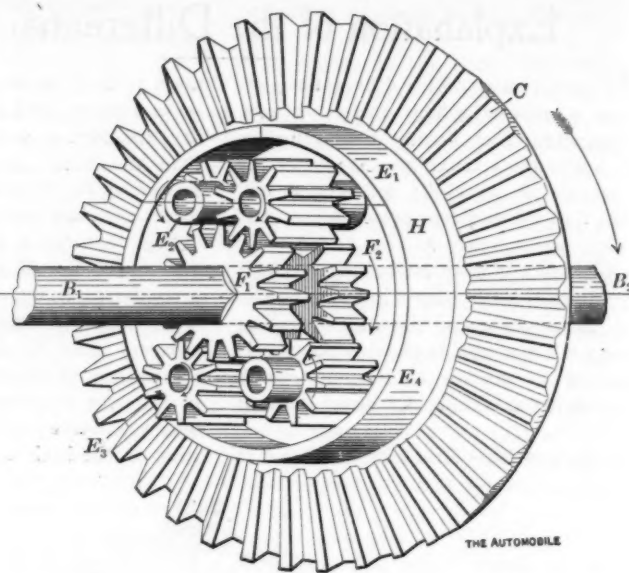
PERSPECTIVE VIEW OF THE SAME GEAR WITH THE DIFFERENTIAL CASING PARTLY REMOVED.
